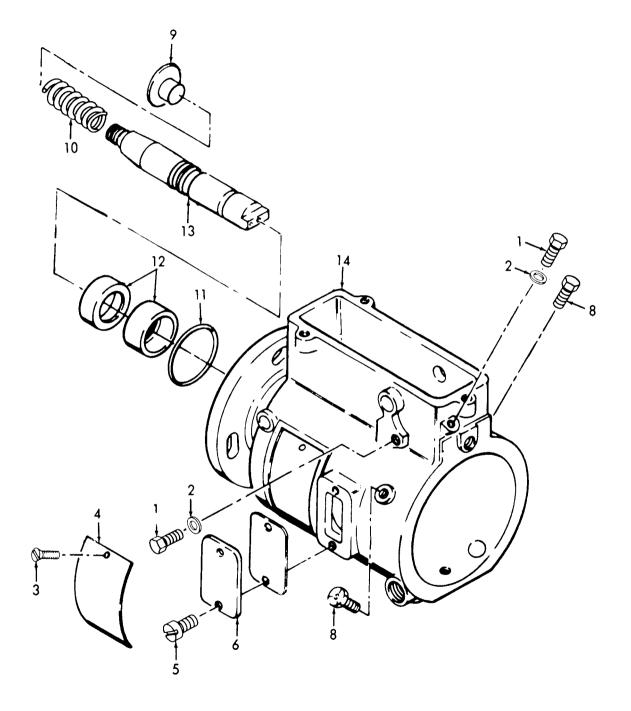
Fuel Injection Pump Housing and Drive Shafts.
